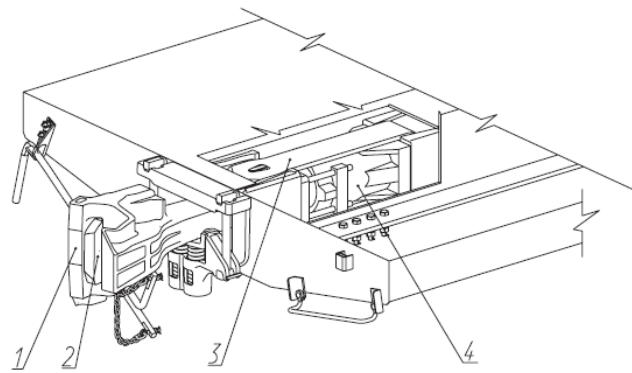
Automatic coupler and draft gear: (1) coupler body; (2) lock; (3) yoke; and (4) draft gear [6].
